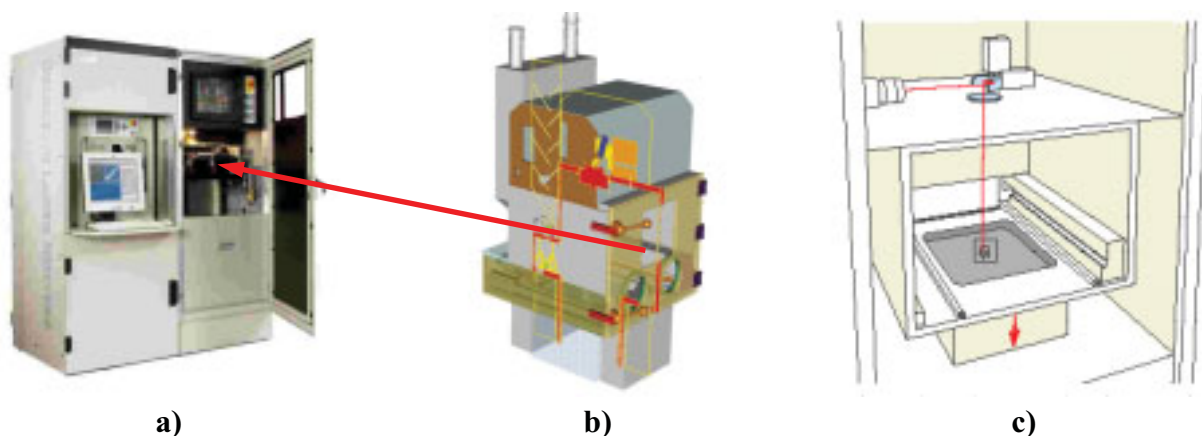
SLM machine housing, CAD model and sketch of process chamber [198], [105]
